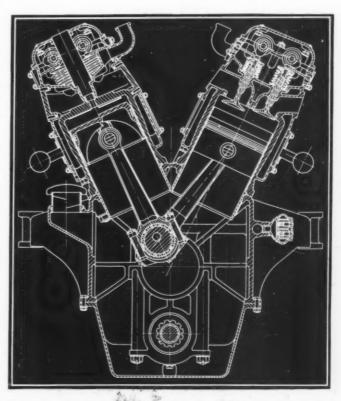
Section of one of the 2000 horsepower engines used in the "Silver Bullet." Note the nitrided steel liners which are inserted in the cylinder bores for wear resistance
